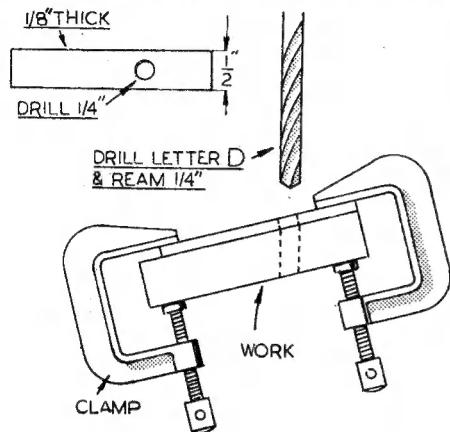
Showing the method of using the drill guide to form the oblique tool housing
